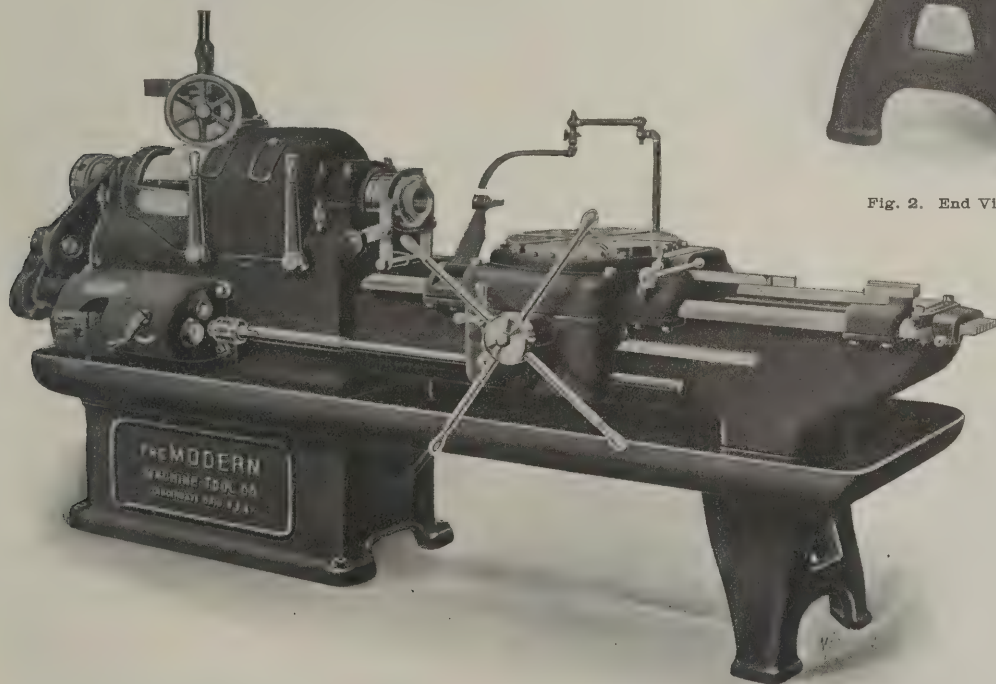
Flat Turret Lathe built by Modern Machine Tool Co.
